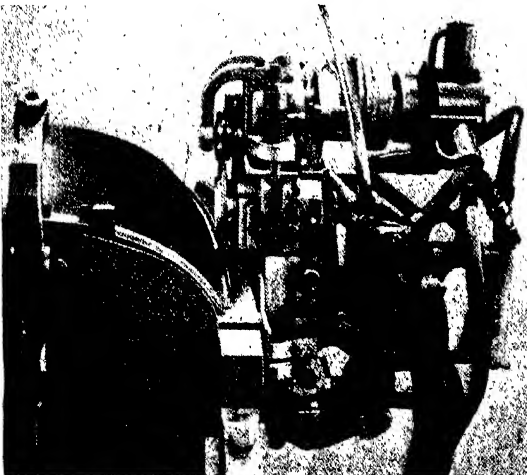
SHOWING HOW THE ROLLER SPOT WELDER IS USED FOR SPOT WELDING THE DRIP Mould ON THE EDGE OF THE ROOF ("Welding")
